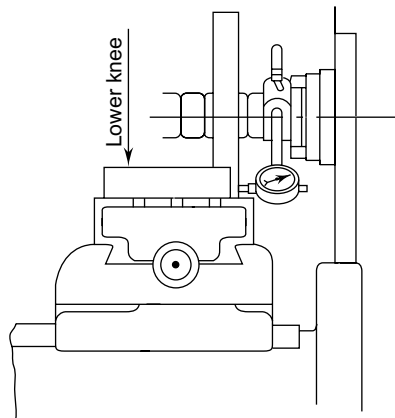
Test setup for the parallelism between the table and the spindle axis in a horizontal milling machine
